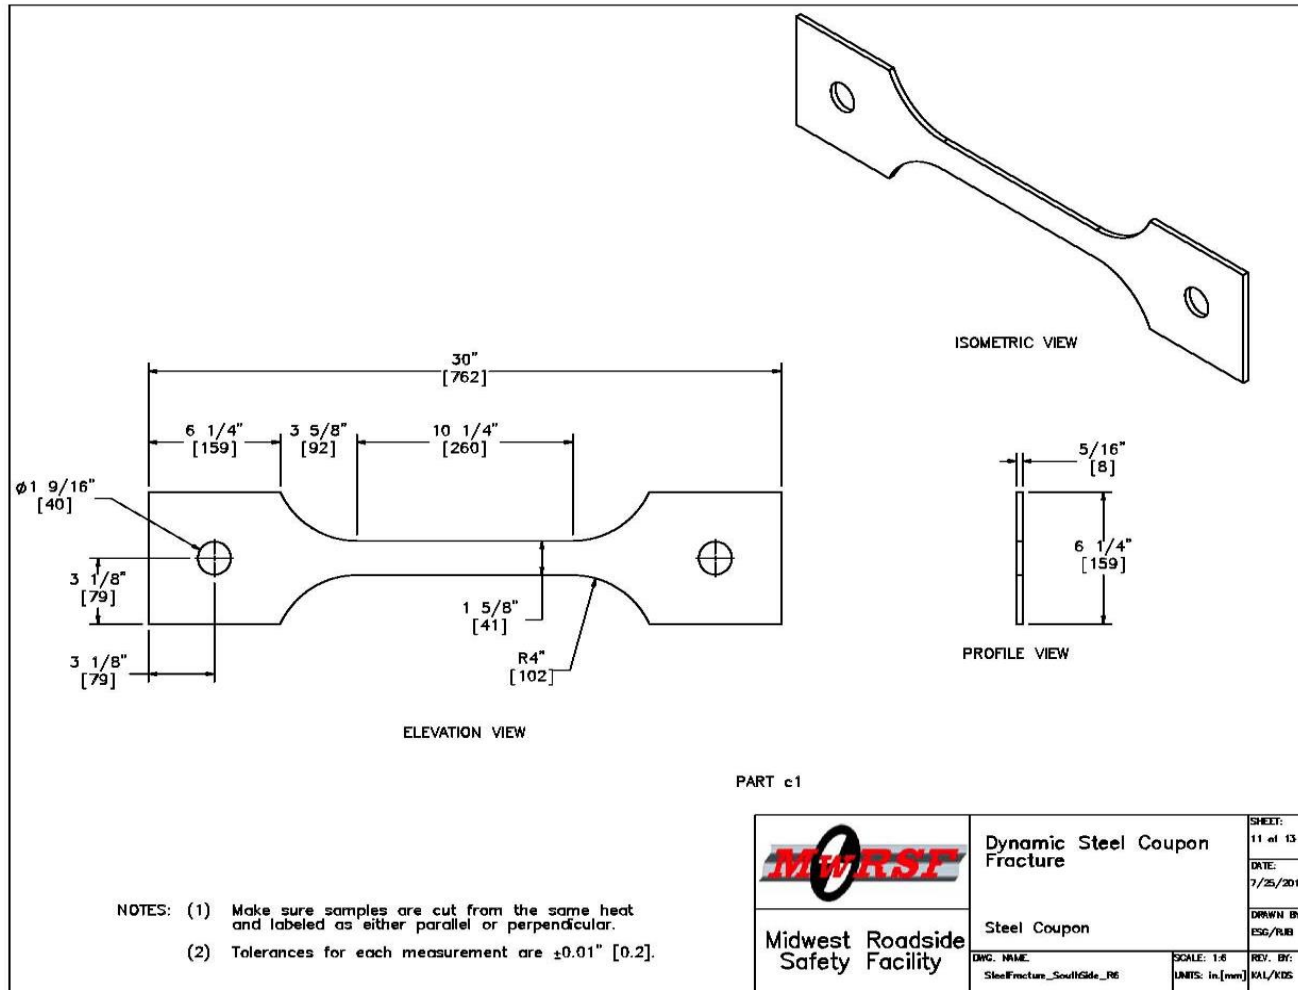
Enlarged A572 Gr 50 Steel Coupon
